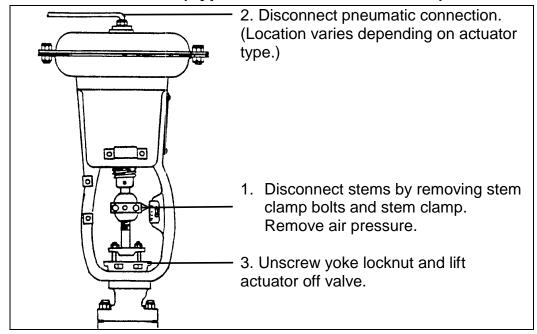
Actuator Removal (Type 01 Pneumatic Actuator)
